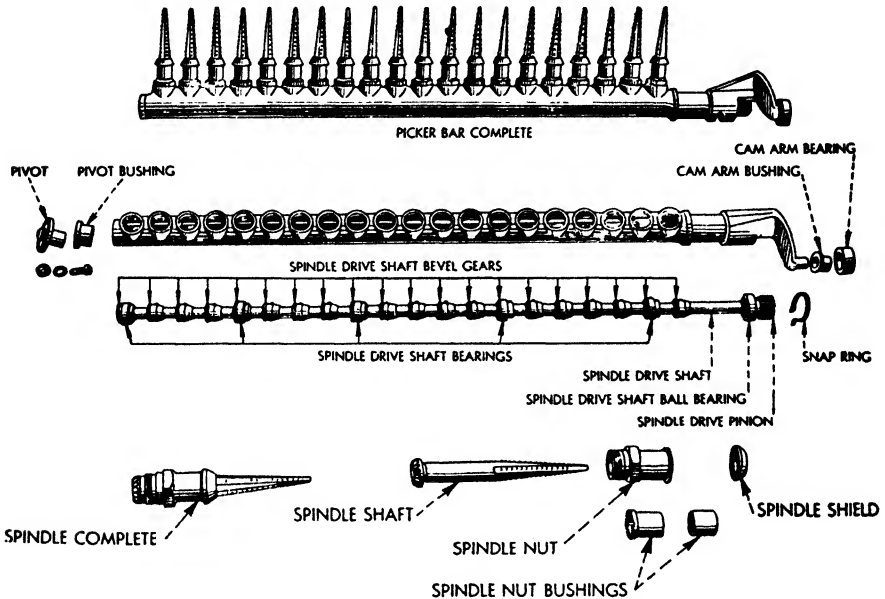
Picker bar complete with spindles. Gearshaft removed showing drive gears, a complete picker bar, and various parts of a spindle. (*International Harvester Company.*)
